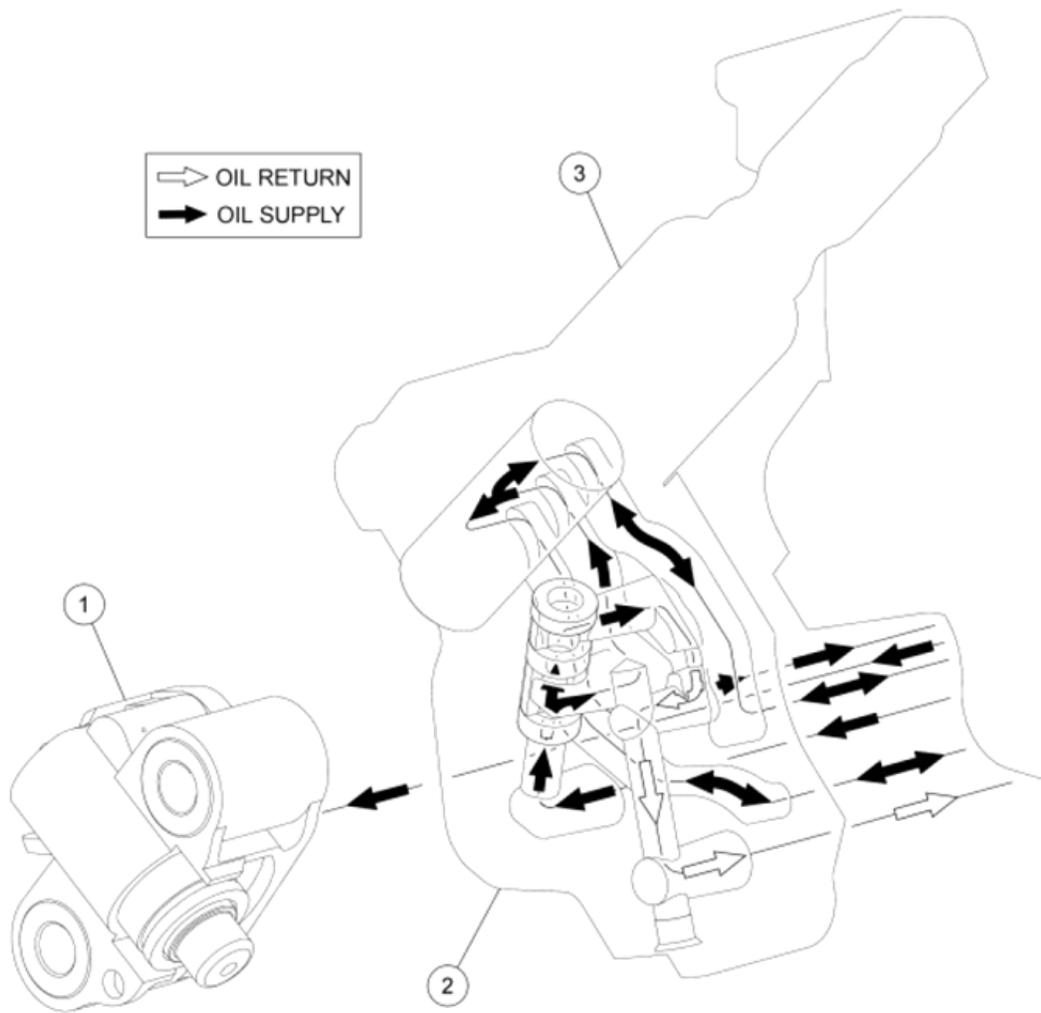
Camshaft Phaser And Sprocket, Camshaft Phaser And Sprocket Bolt And Camshaft - Oil Flow Diagram
